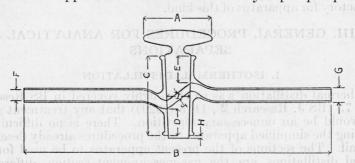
Drawing of stopcock for parts of apparatus subjected to low pressures.
